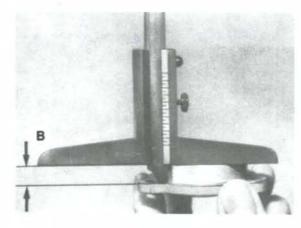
Measure bearing retainer flange distance with gasket in place. Refer to text.
